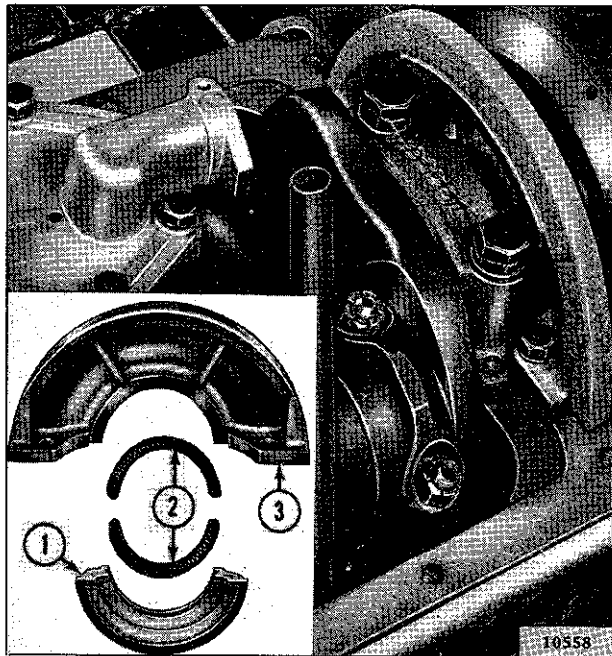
CRANKSHAFT REAR OIL SEAL AND FILLER BLOCK
